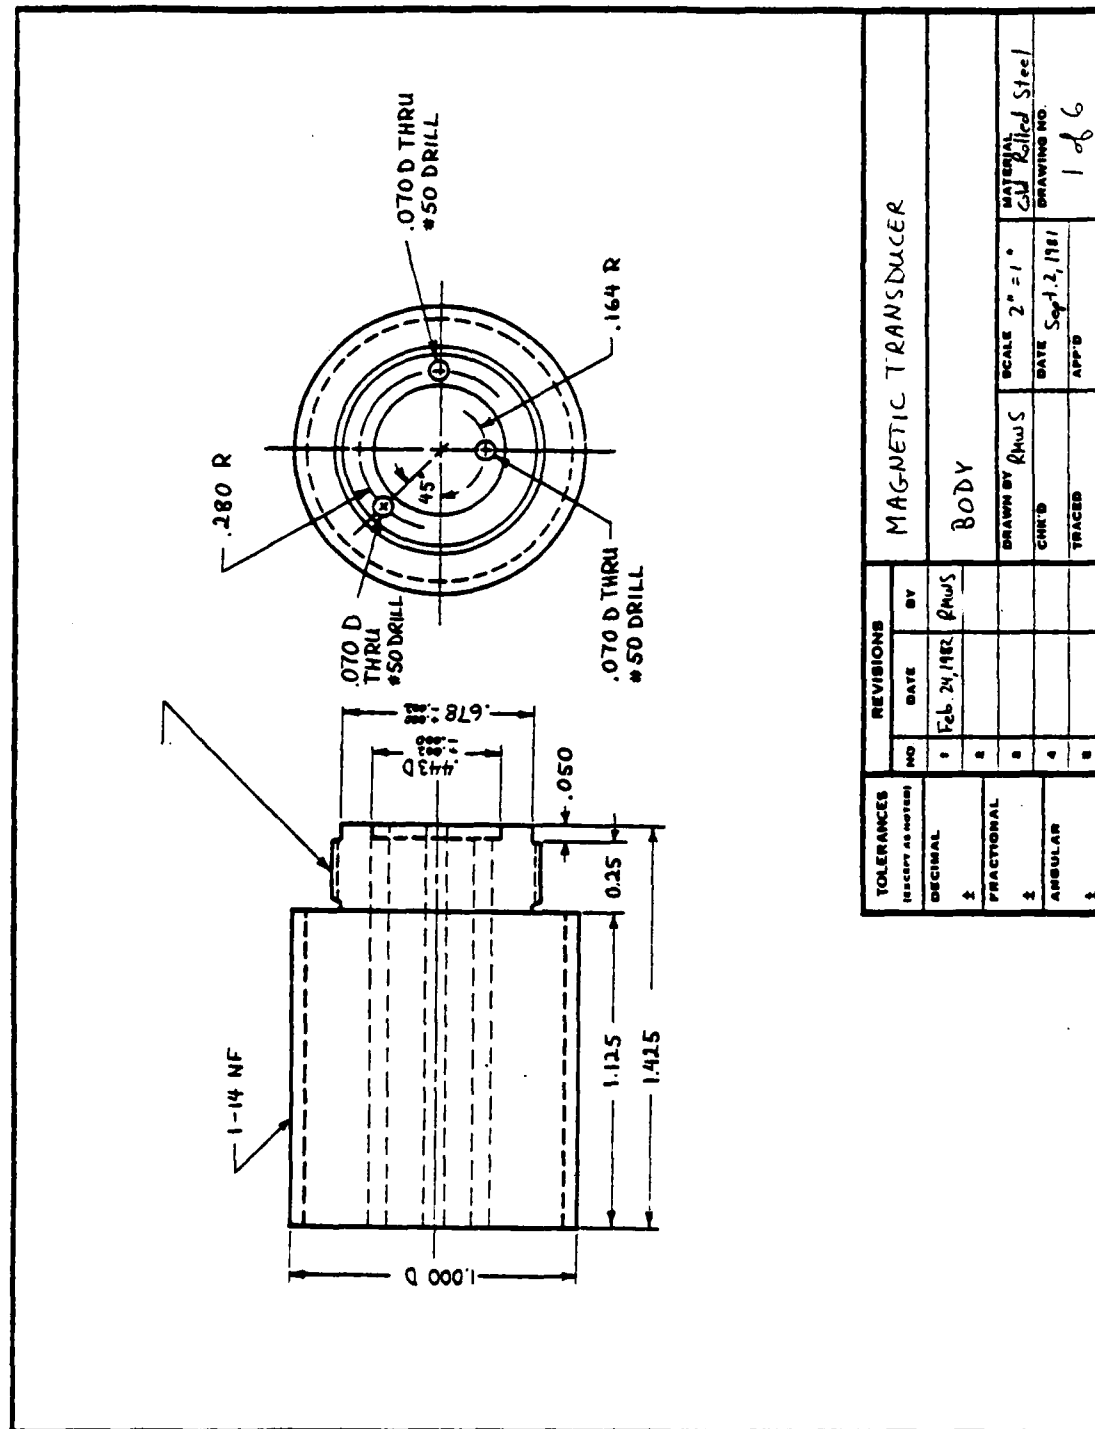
through 3.7 show the design drawings of the parts of the transducer assembly.
